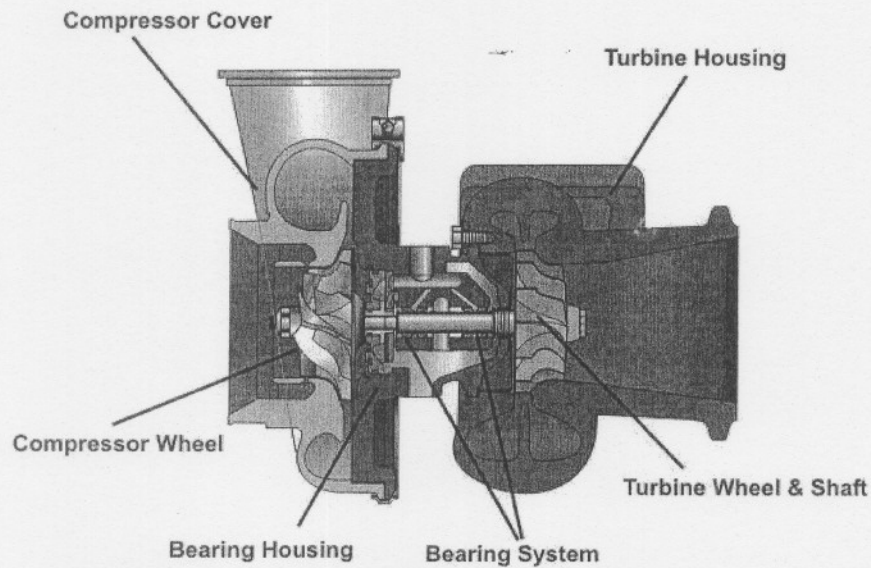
Cross section view of a typical turbocharger (TruckPro)
